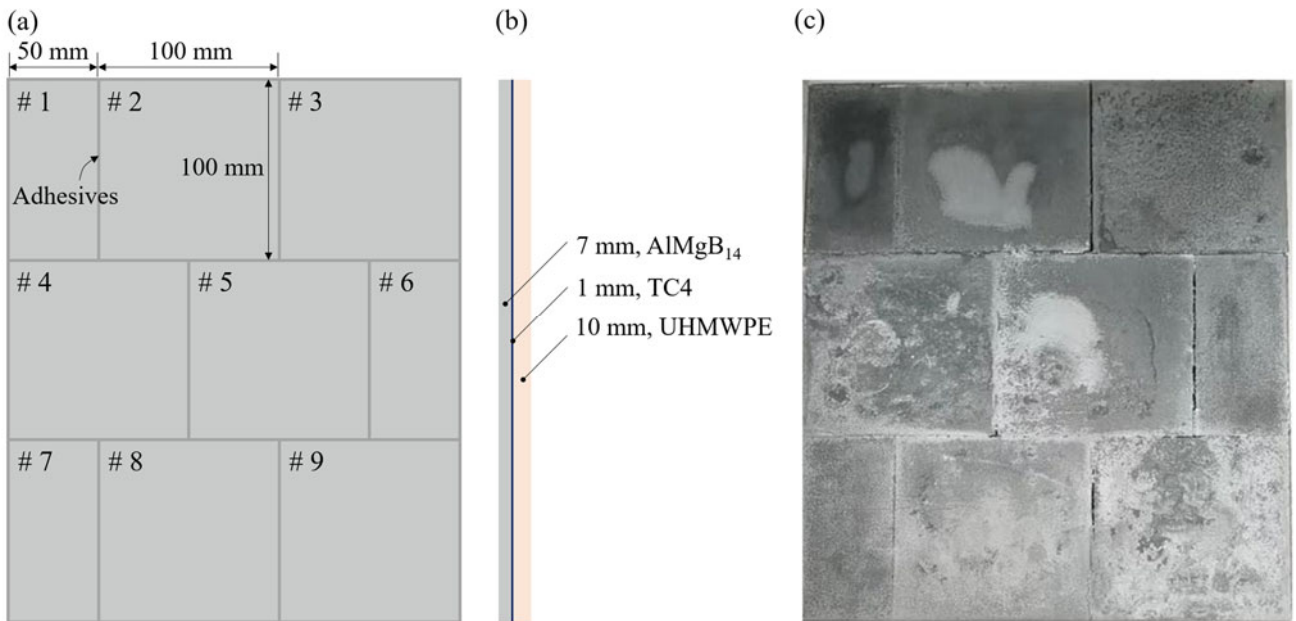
Schematics of the (a) front view and (b) side view of the target plate. (c) Experimental target plate.
